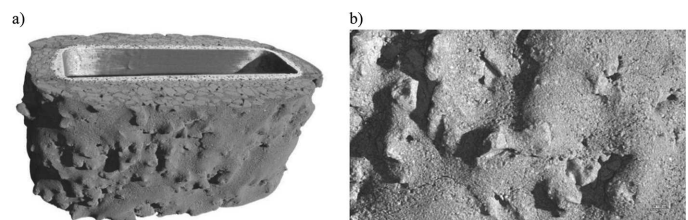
3D image of the part of the tested mould (a), external surface of the mould (b)
